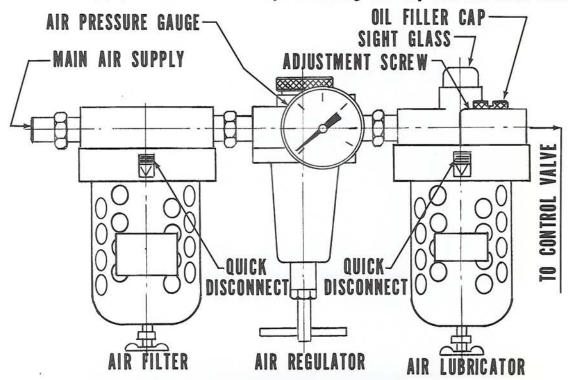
AIR LUBRICATOR-REGULATOR-FILTER
